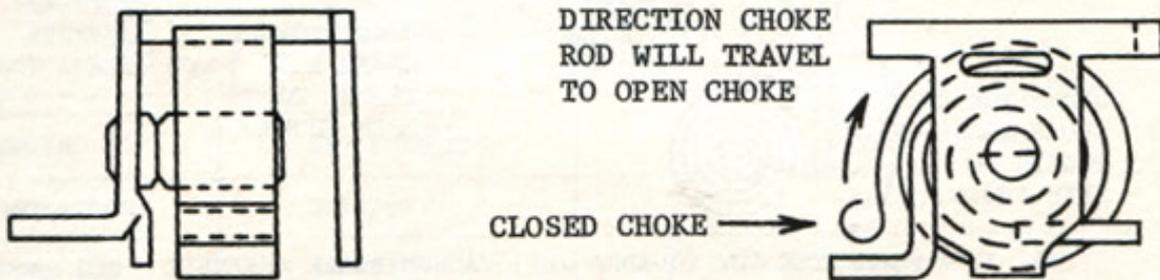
FIG. II - CHOKE THERMOSTAT ASSEMBLY - 327 V-8 (275 HP)
